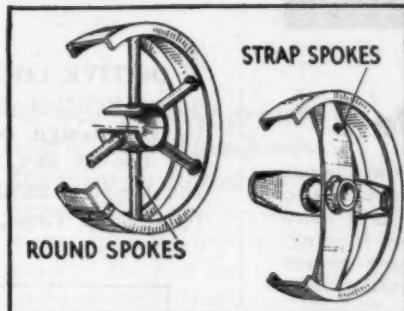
Low cost wheel is made with spokes formed from round bars or steel straps. Spokes are fillet welded inside the channel rim. Hub if required is produced from steel tubing.
